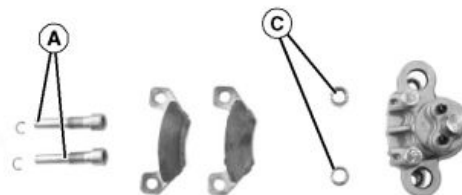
Picture Note: SN 40001- machine rear calipers shown. SN -40000 similar
